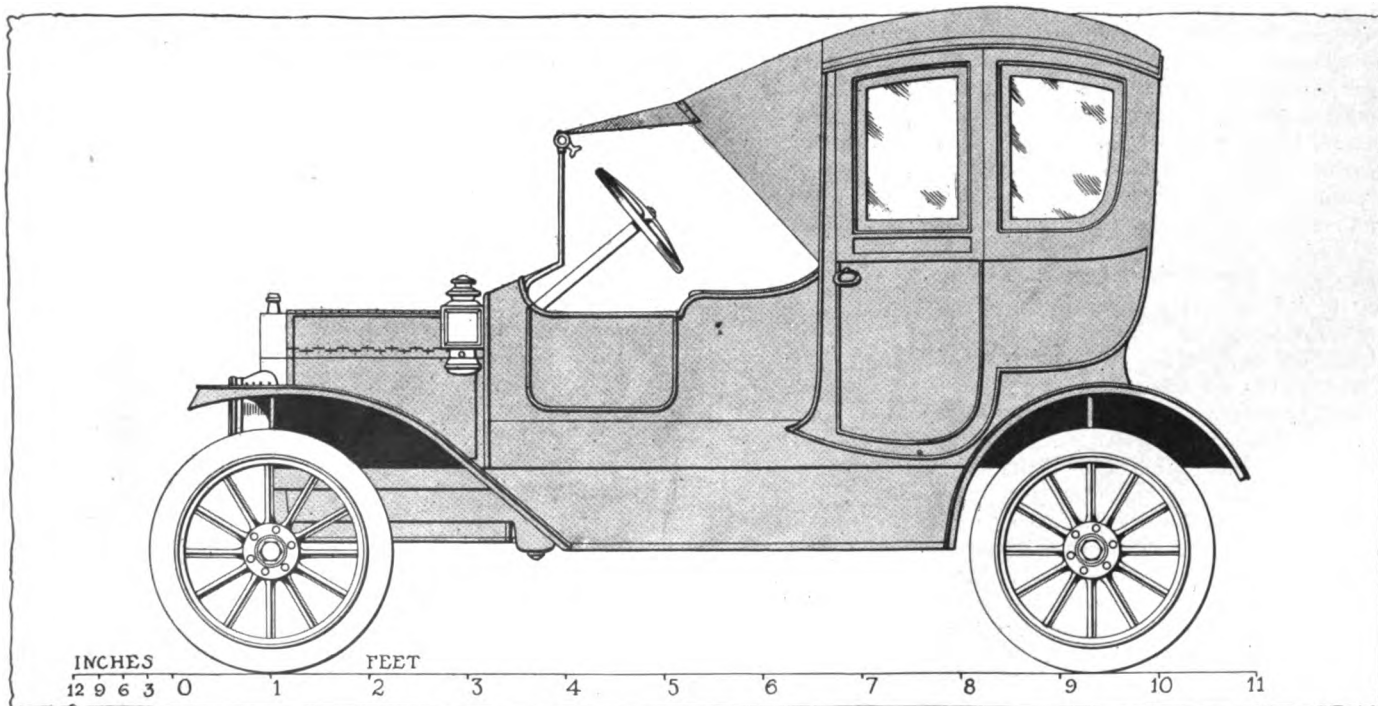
Same coupé body moved back on the chassis to permit of the addition of a fore-body
